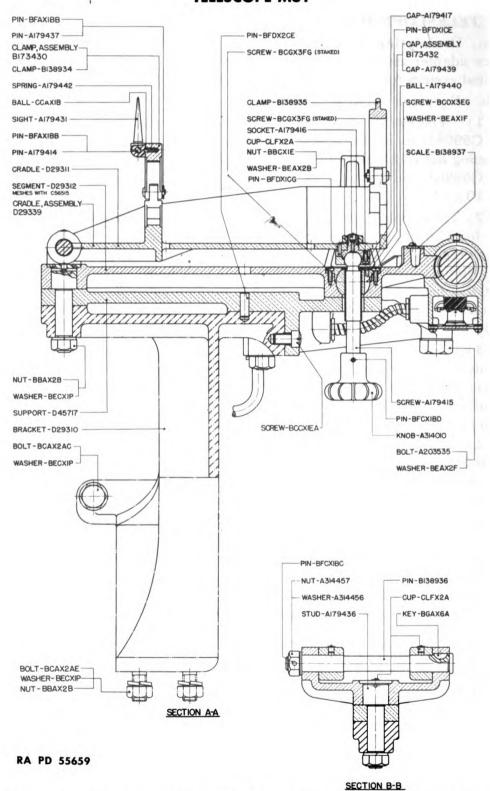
Telescope Mount M35—Sectional Views Through Planes A-A and B-B (Location of section planes is shown in fig. 3)
